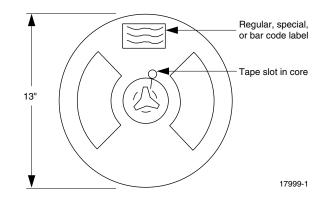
Tape and Reel Shipping Medium (1000 units per reel)
